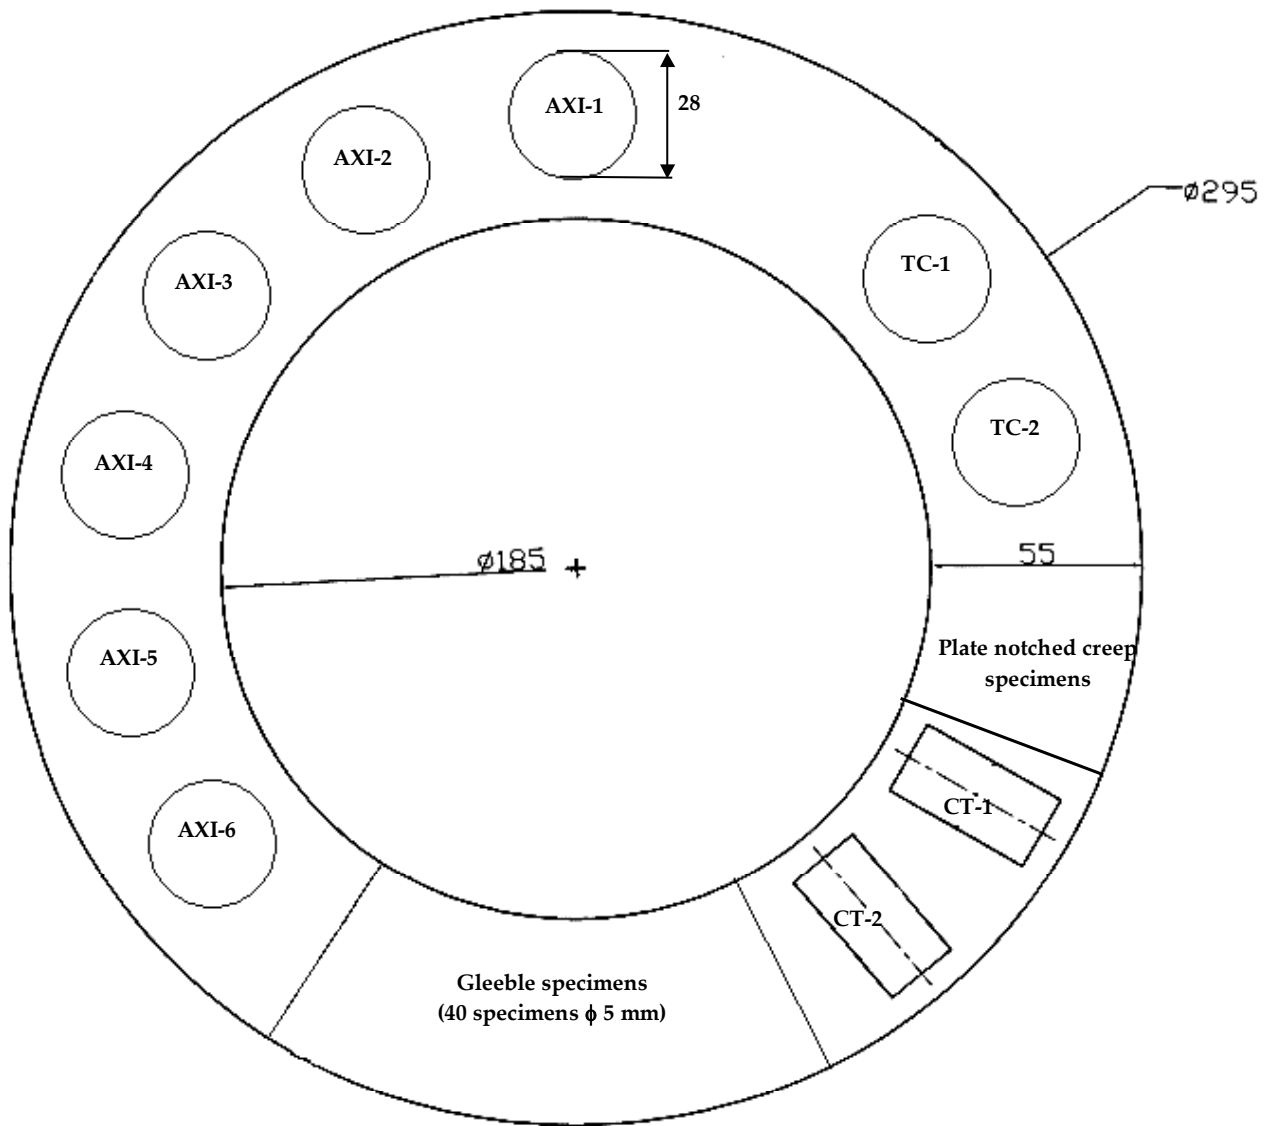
Location of creep test specimens in the P91 steel (2)
